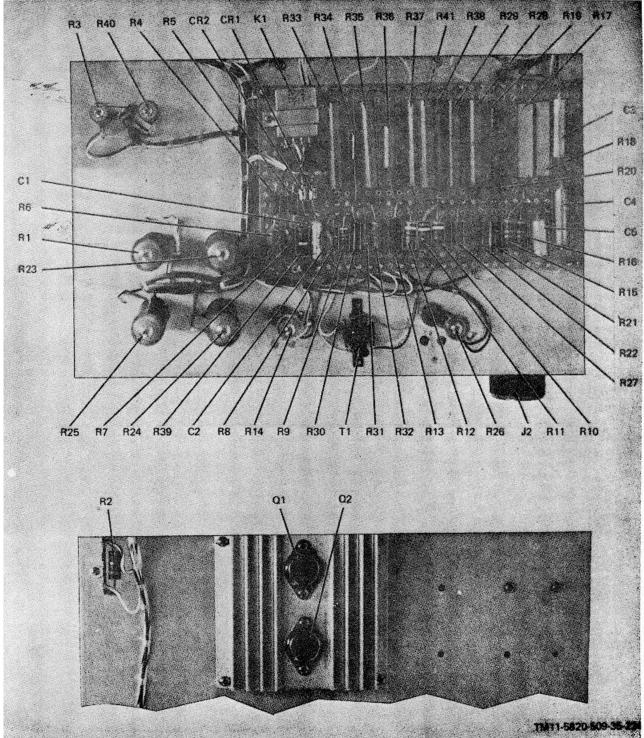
Test Fixture for Power Supply PP-3518/PRC-47, Internal Parts Location.
